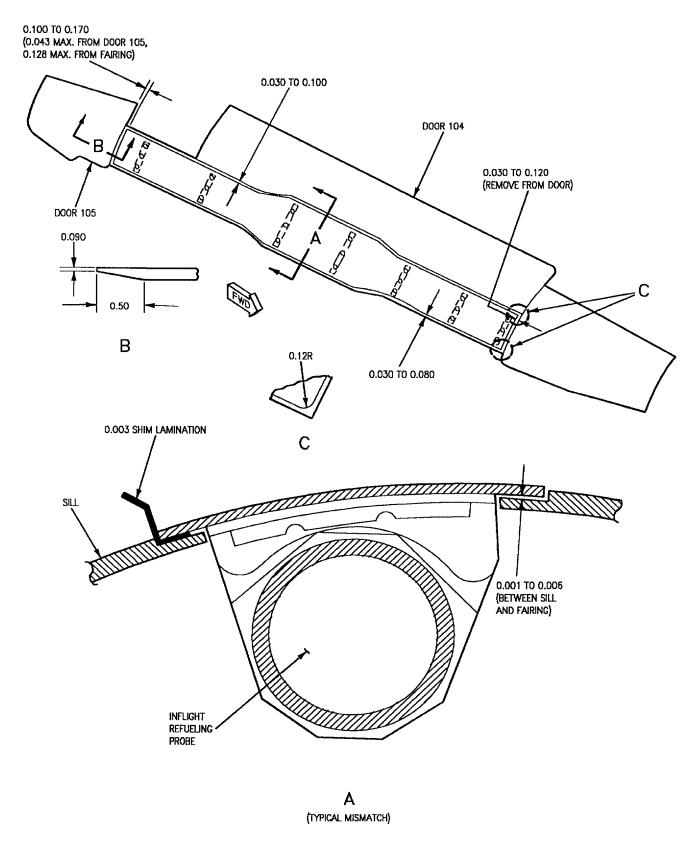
Replacement of Fairing Assembly (Sheet 2)
